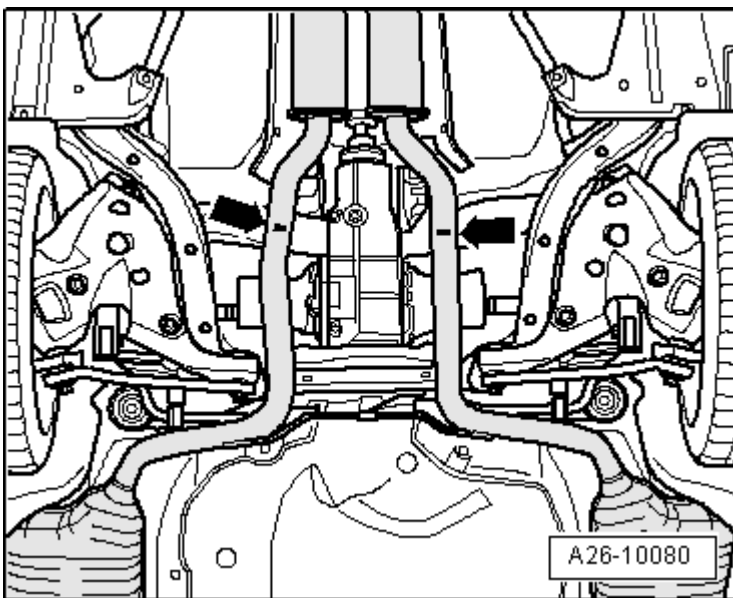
Separating Exhaust Pipes At Separating Point Using Chain Pipe Cutter VAS 6254 At Right Angle
